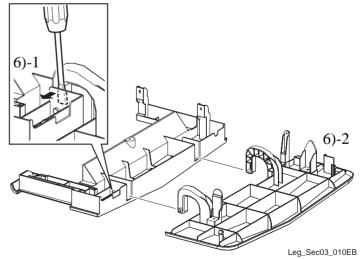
Removal of COVER FRONT L and COVER FRONT ASSY U (2)
